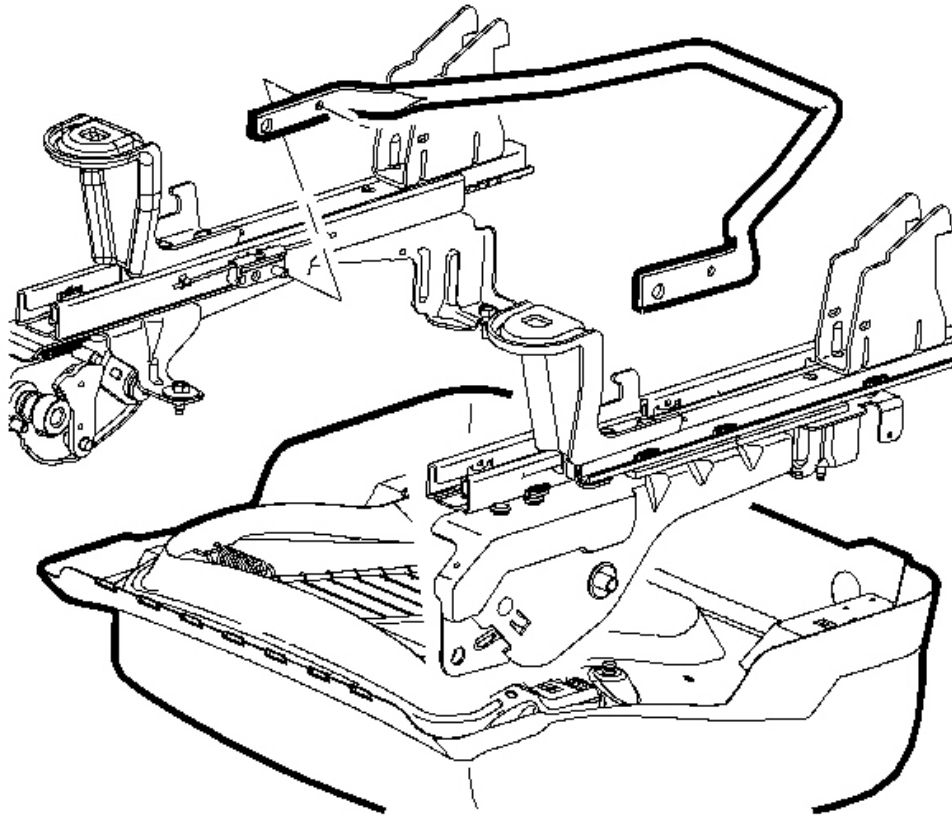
Removing/Installing Seat Cushion Frame Assembly
